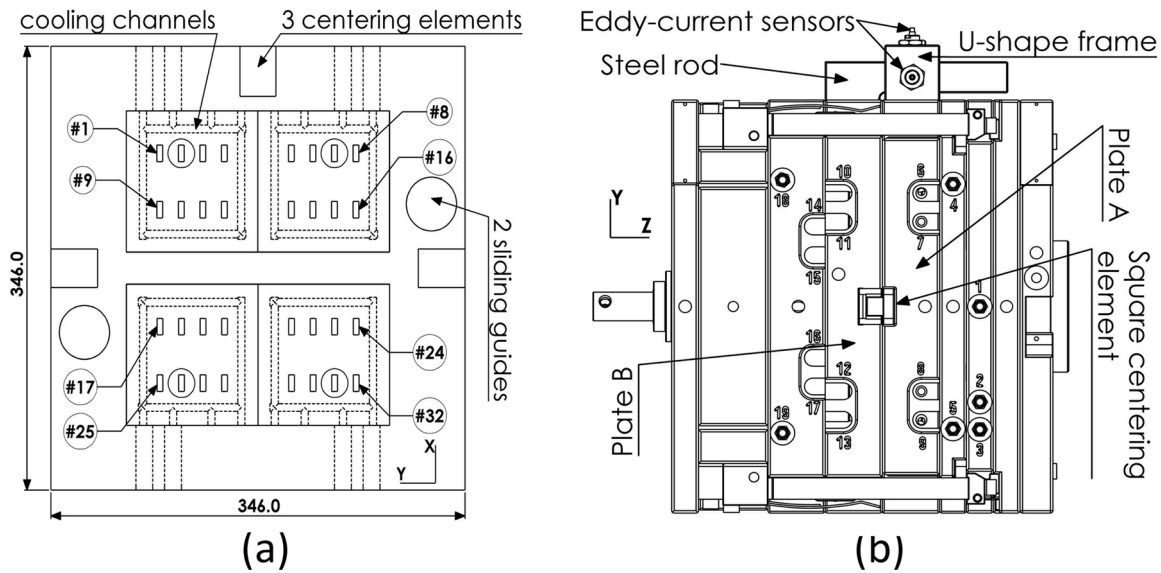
Schematic of the testing mold (a) front view; (b) side view (dimensions in mm).
